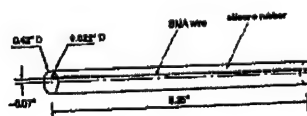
Dimensions of silicone rod with off-axis SMA wire.
